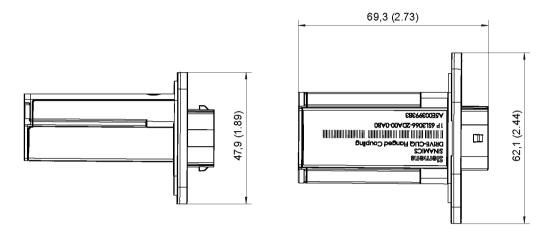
Dimension drawing, DRIVE-CLiQ cabinet bushing with RJ45 plug, all data in mm and (inch)
